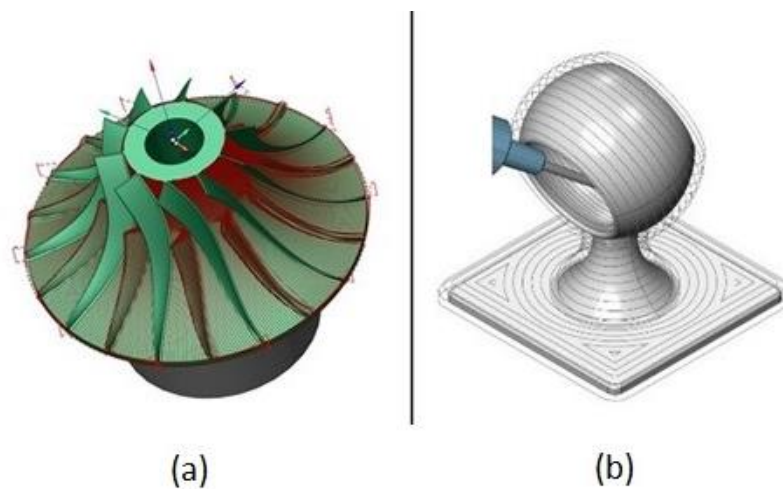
Cut Pattern Morphing Between the Blade Surfaces (a) Path Following a Spherical Cut Pattern (b); both parts presented can be manufactured on 5-axis machines with Head-Head or Head-Table configurations [26,27]
